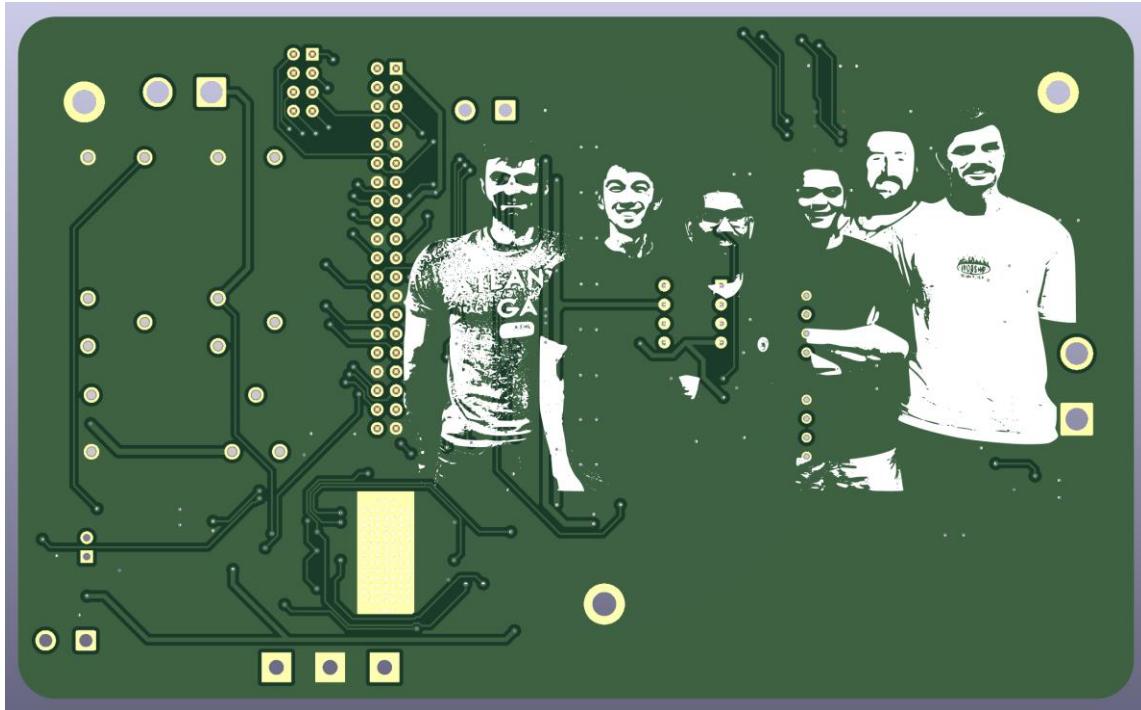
Bottom view of the final PCB design, rendered in KiCad showing the group picture on the silkscreen
